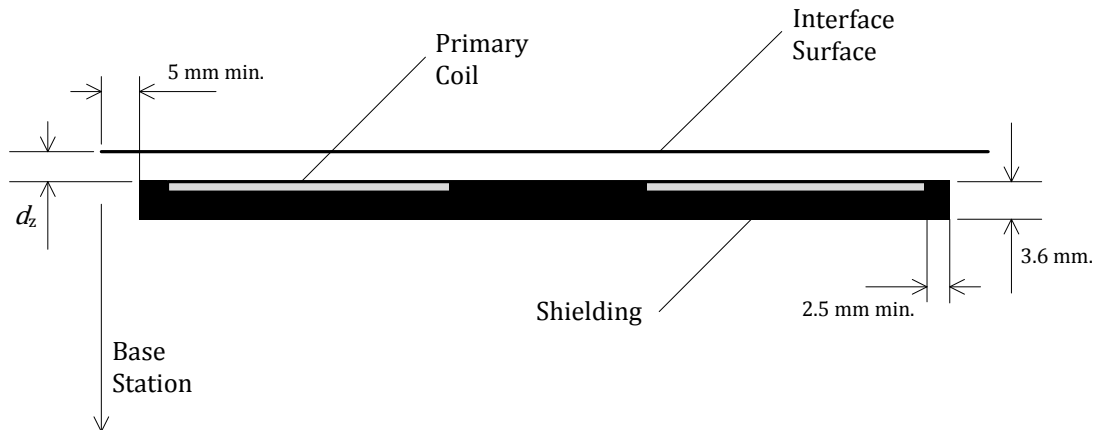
Primary Coil assembly of Power Transmitter design A8
